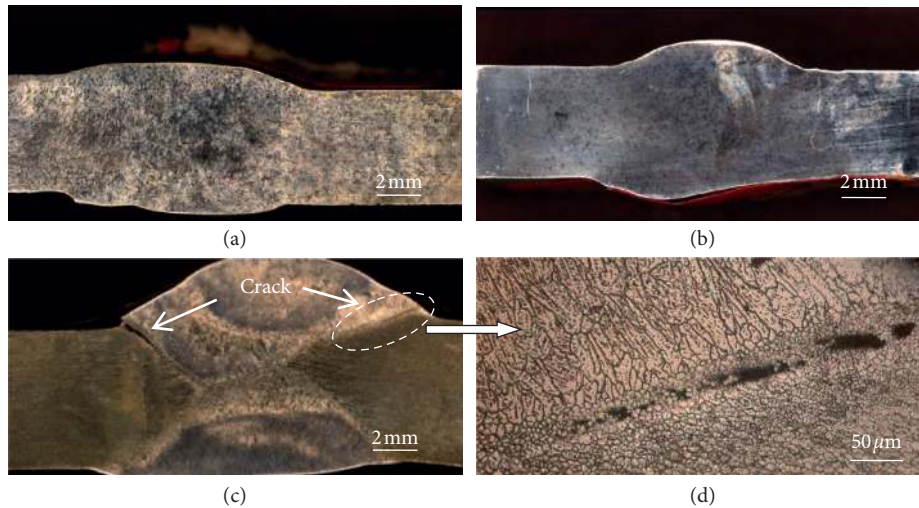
Photos of welded joints. (a) Pure 7055 welded joint. (b) 1.5 wt.% ZrB<sub>2</sub>/7055 welded joint. (c) and (d) 1.5 wt.% ZrB<sub>2</sub>/Al-Mg welded joint.
